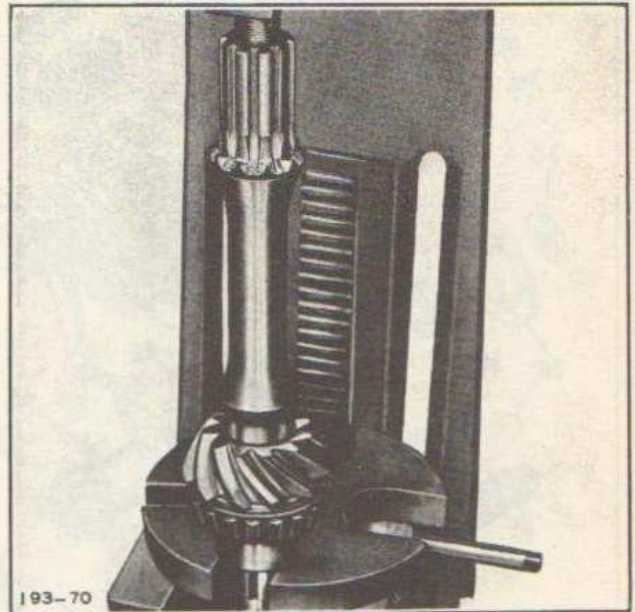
Pressing Pinion and Bearing on Thru Shaft
